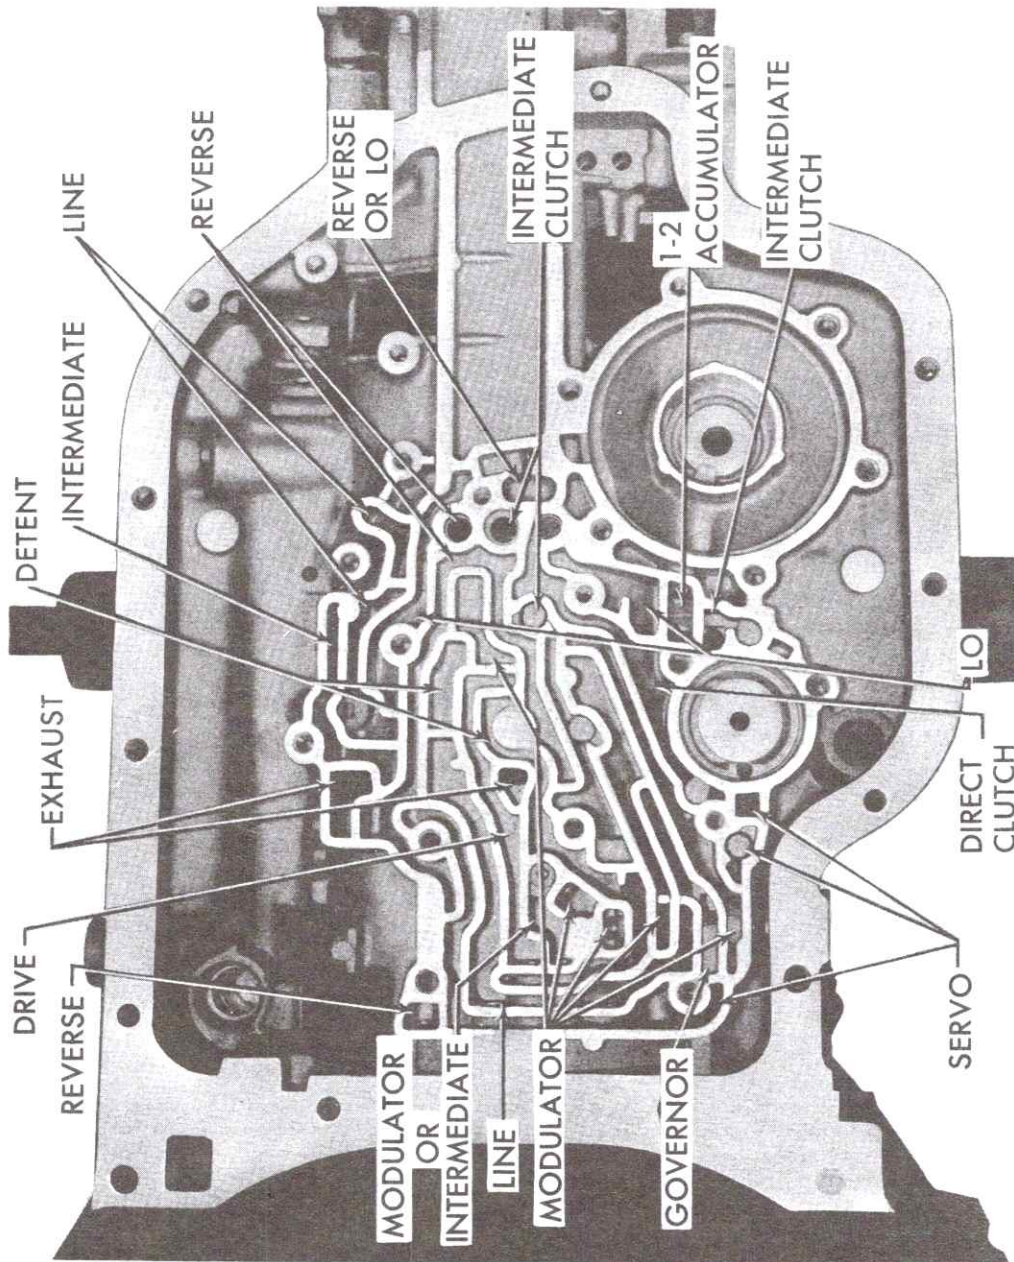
Transmission Case Oil Passages - Bottom View
